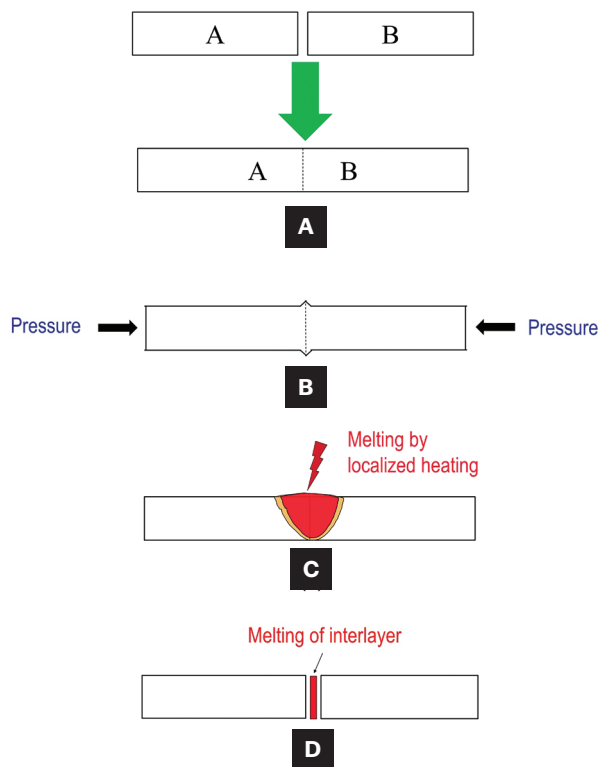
Schematic showing: A – Two workpieces before and after welding, and various welding and joining processes including: B – solid state bonding; C – fusion welding; D – brazing and soldering.
